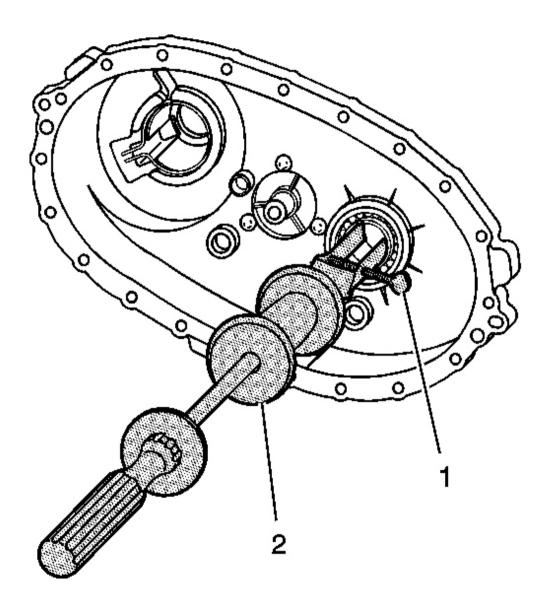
Identifying J 26941 & J 23907 Courtesy of GENERAL MOTORS CORP.
